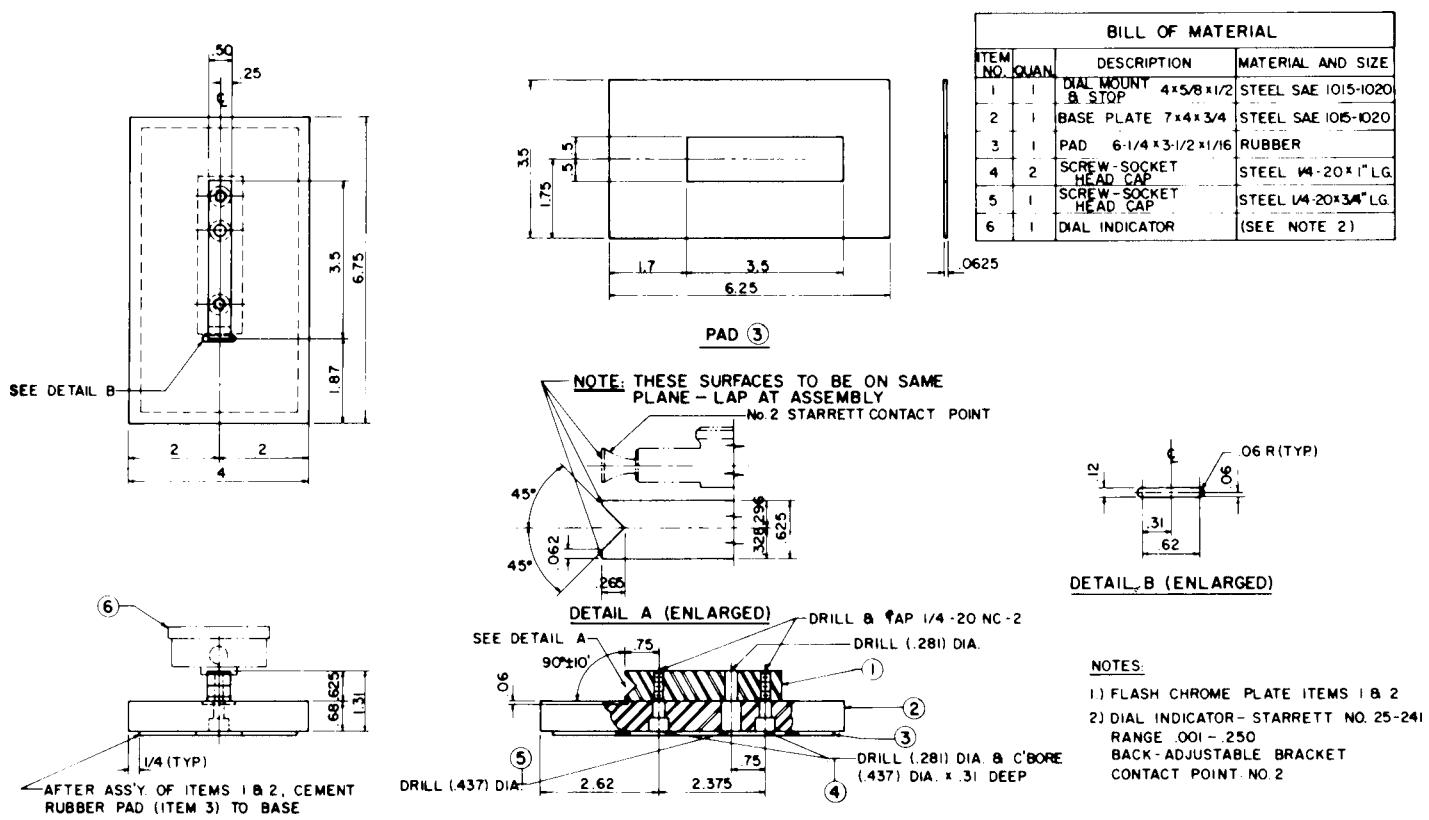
Assembly and Details for Lateral Expansion Gauge
